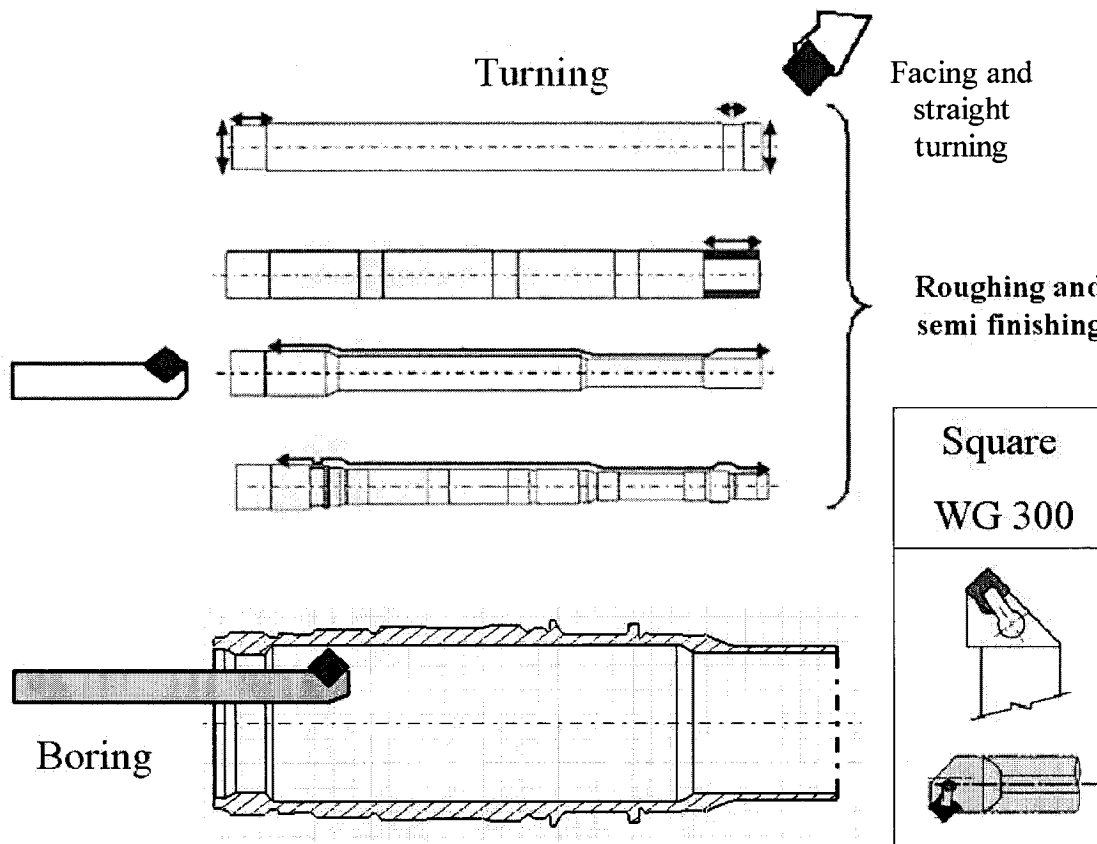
Cutting tools for the shaft machining process in roughing and semi finishing
